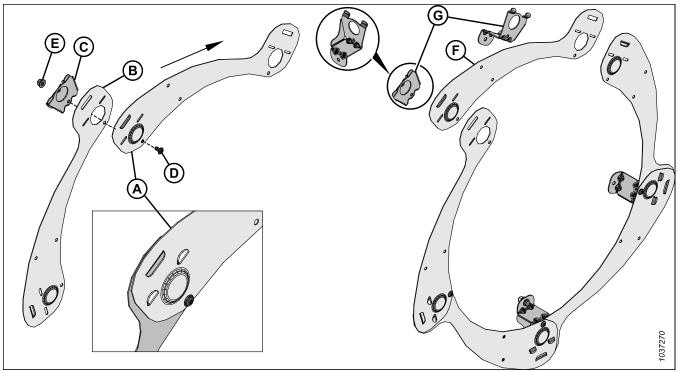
Five-Bat Reel – Initial Endshield Assembly
